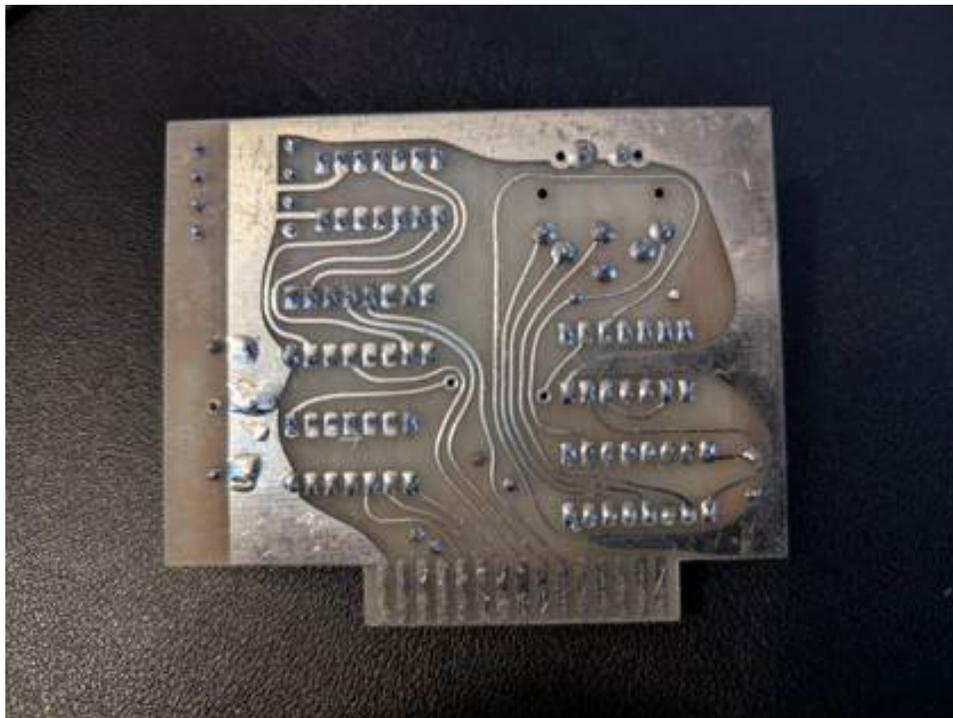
Solder side — single-sided traces, wire jumpers, bare copper
